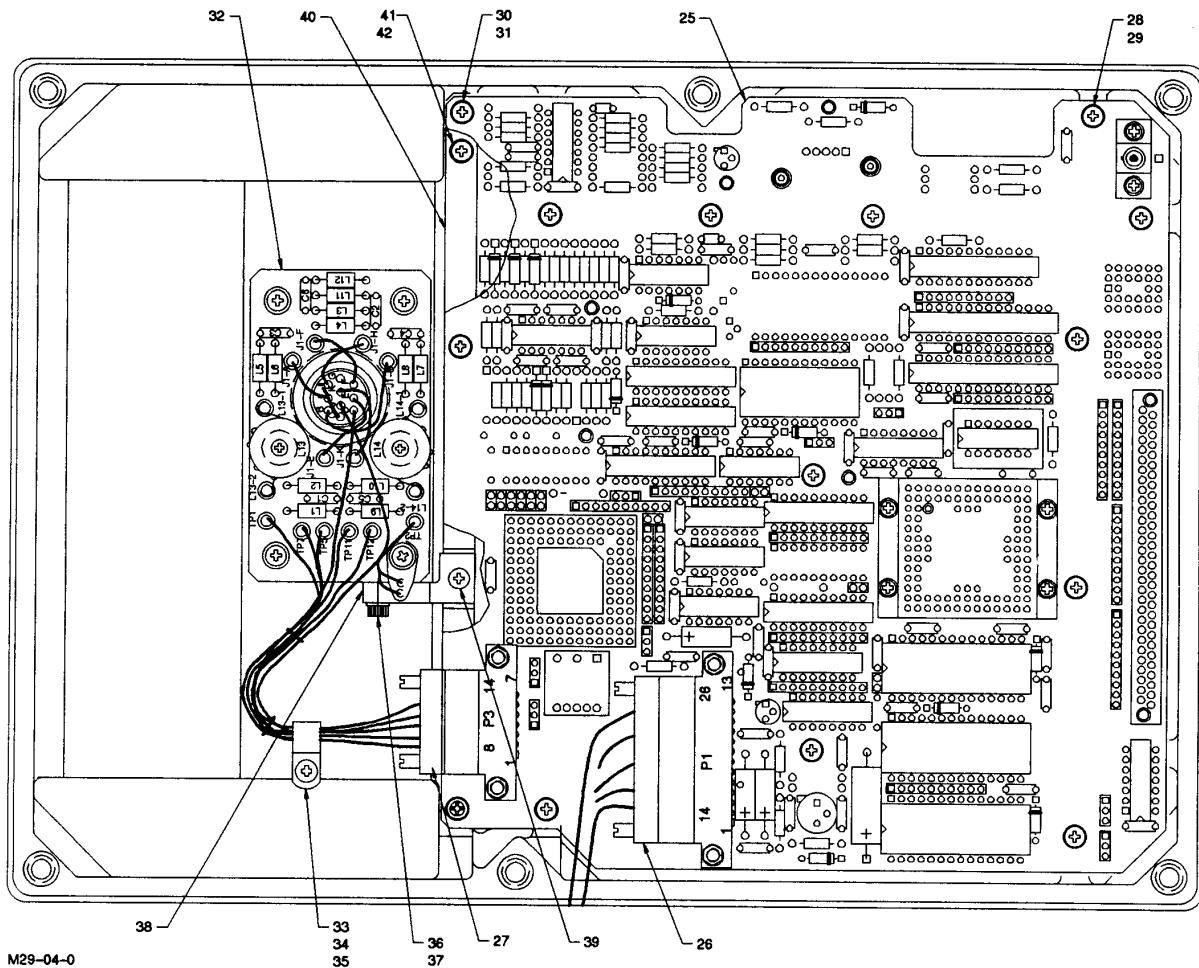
Transceiver Assembly AY6707292-O (Sheet 1 of 3)
